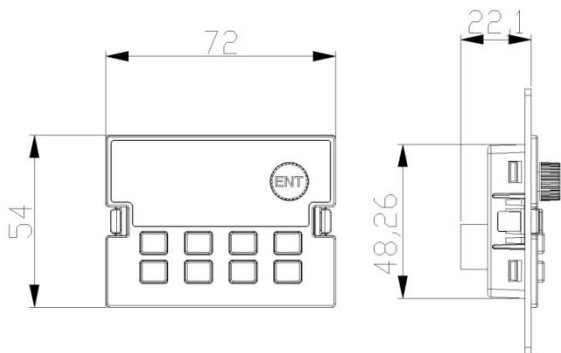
Keypad appearance and dimensions of 22kW below (unit: mm)
